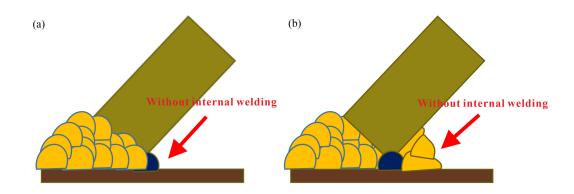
Two different welding designs of nodes: (a) in Europe and (b) in Taiwan. The blue area is the first bead.
